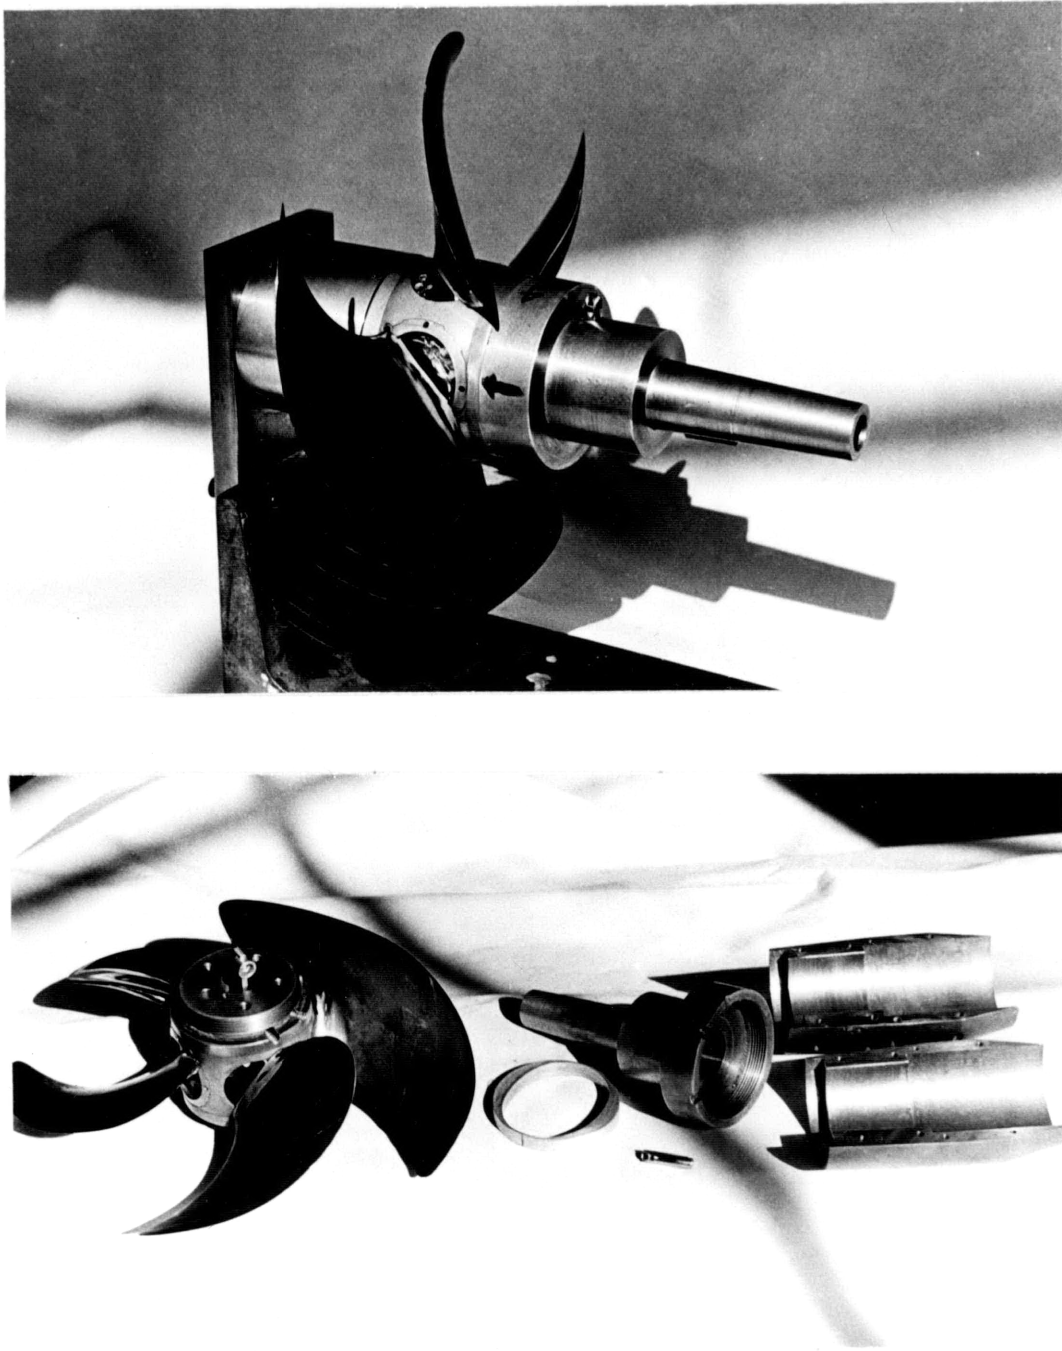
COMPONENTS OF THE HUB AND MECHANISM
